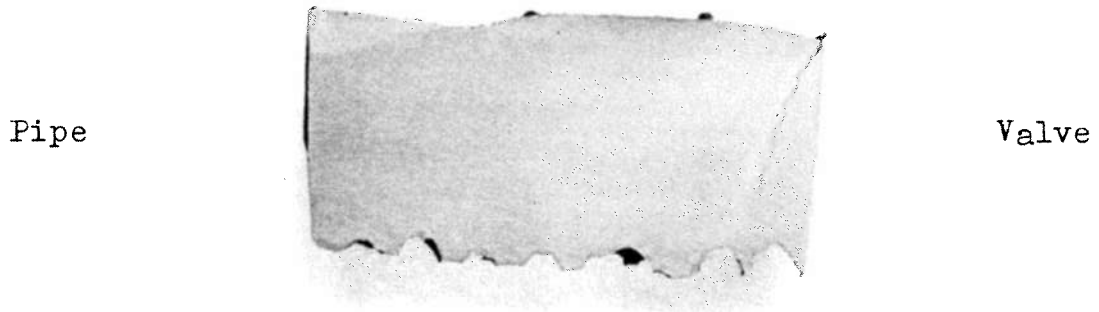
Crack in graphitized zone on valve side of "weld-probe" specimen in valve-to-pipe joint. (Because of dimensions of valve, the specimen was removed by drilling out.)
